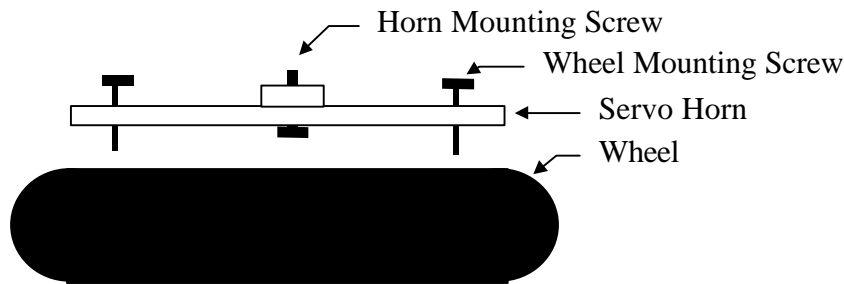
How to mount a servo horn onto a wheel. Be sure the horn mounting screw is placed into the horn before fastening the horn to the wheel with the other two screws.
